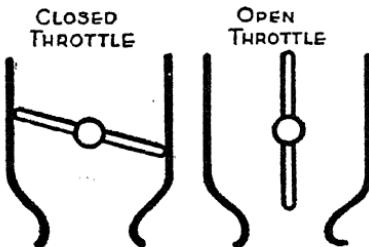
Open and Closed Throttle as Illustrated in Conventional Drawings
